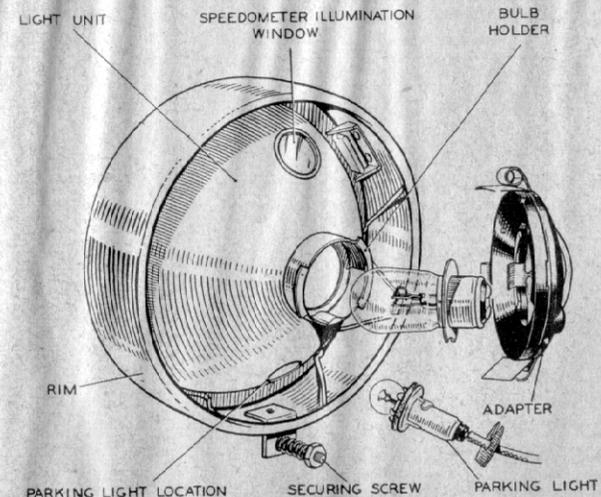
Model F575P Light Unit and Rim removed from Lamp Body.
